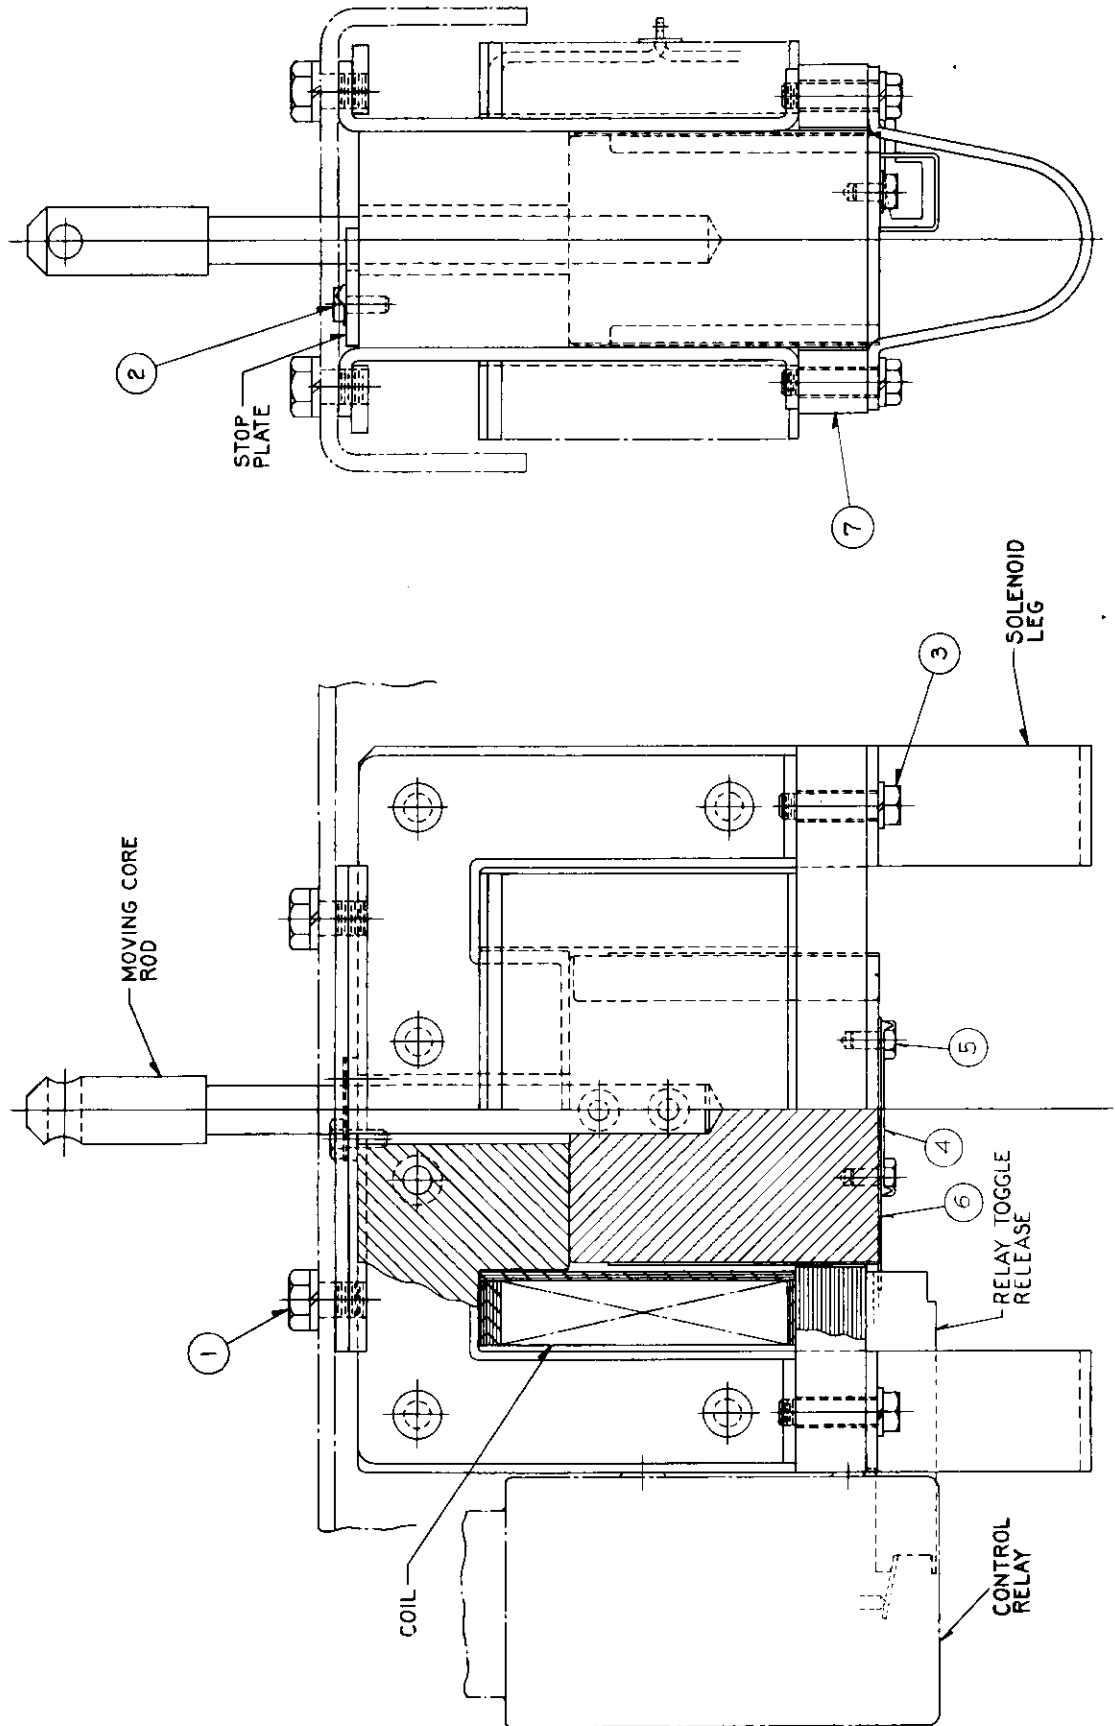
CLOSING SOLENOID - CONSTRUCTION DETAILS
